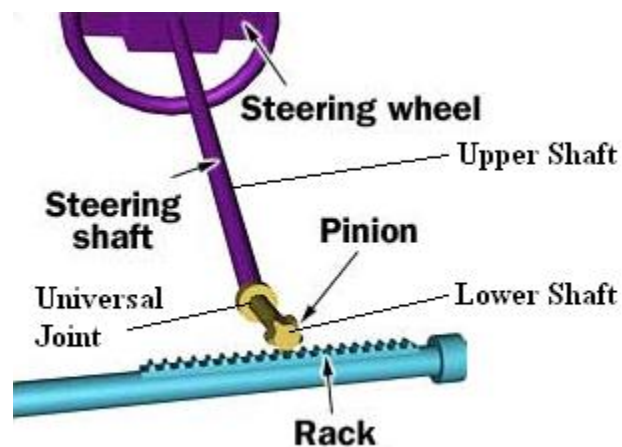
Steering shaft. (Nice, How Car Steering Works, 2001)
